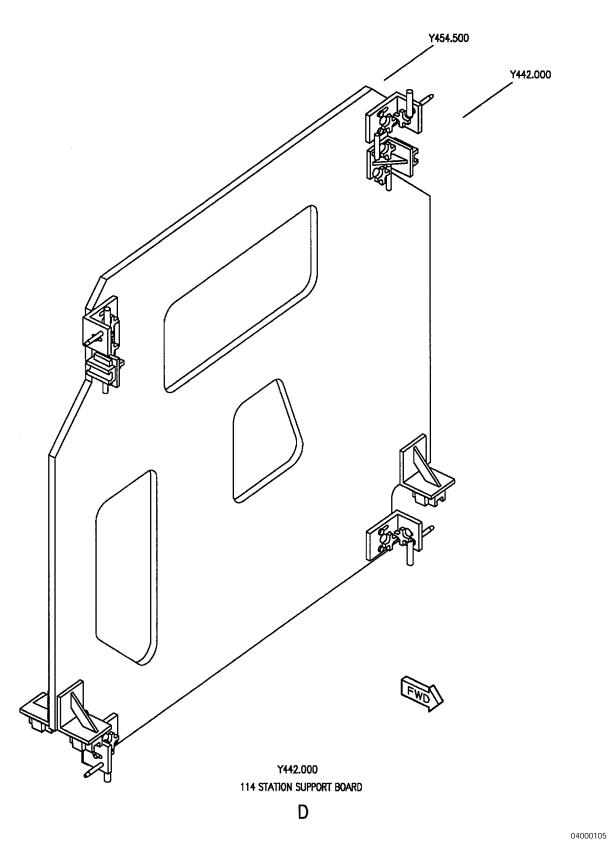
Engine Air Inlet Maintenance Fixture; RE174322020-2 RH (Sheet 5)
